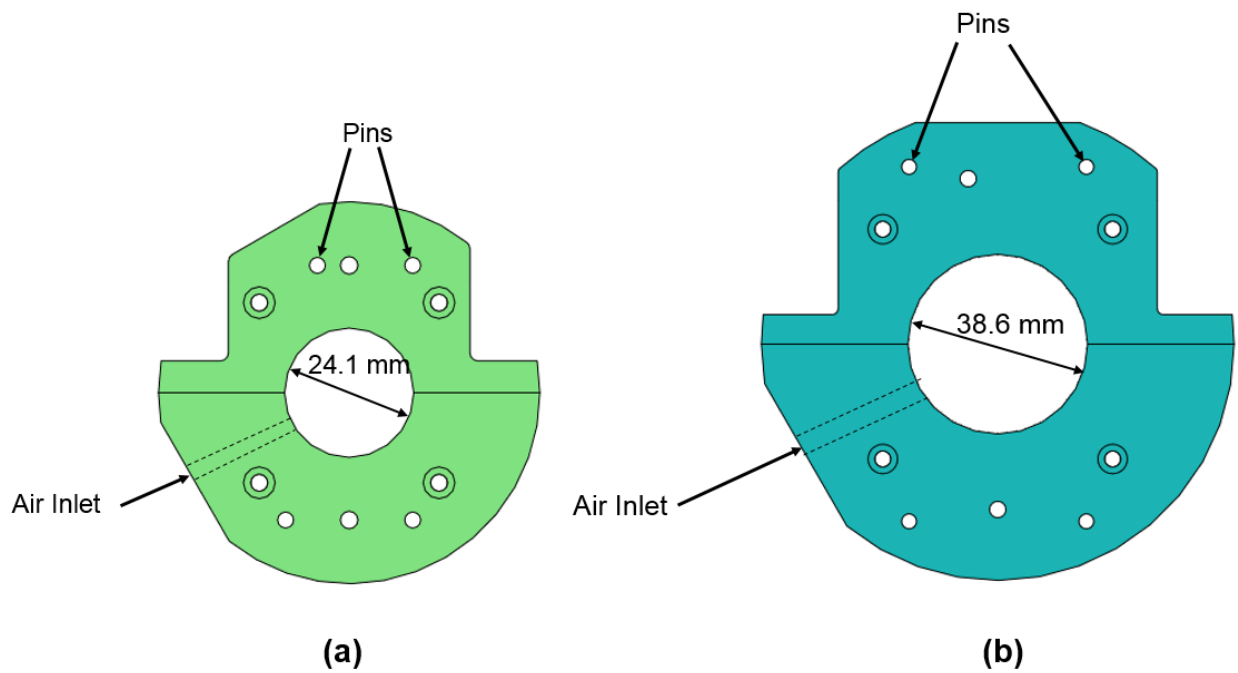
(a) Air buffer seal on the motor drive end. (b) Air buffer seal on the rotor free end.
